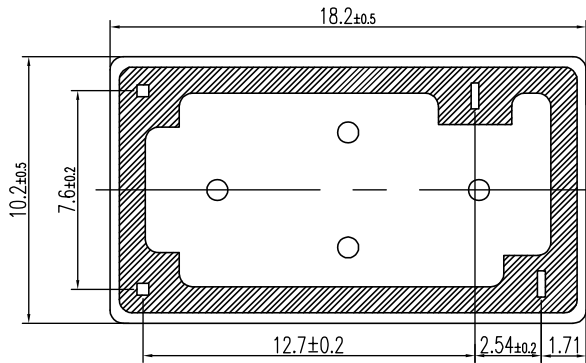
FIGURE FOR PRINTED CIRCUIT BOARD PROCESSING (BOTTOM VIEW)
